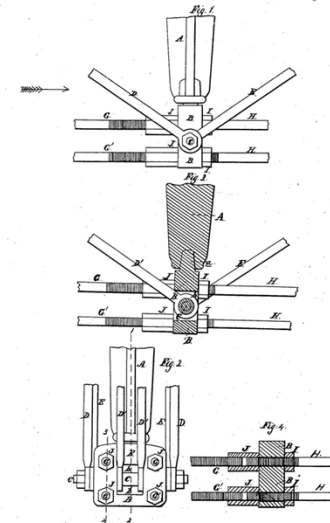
, a sectional elevation on the line 1-2, Fig. 2.
